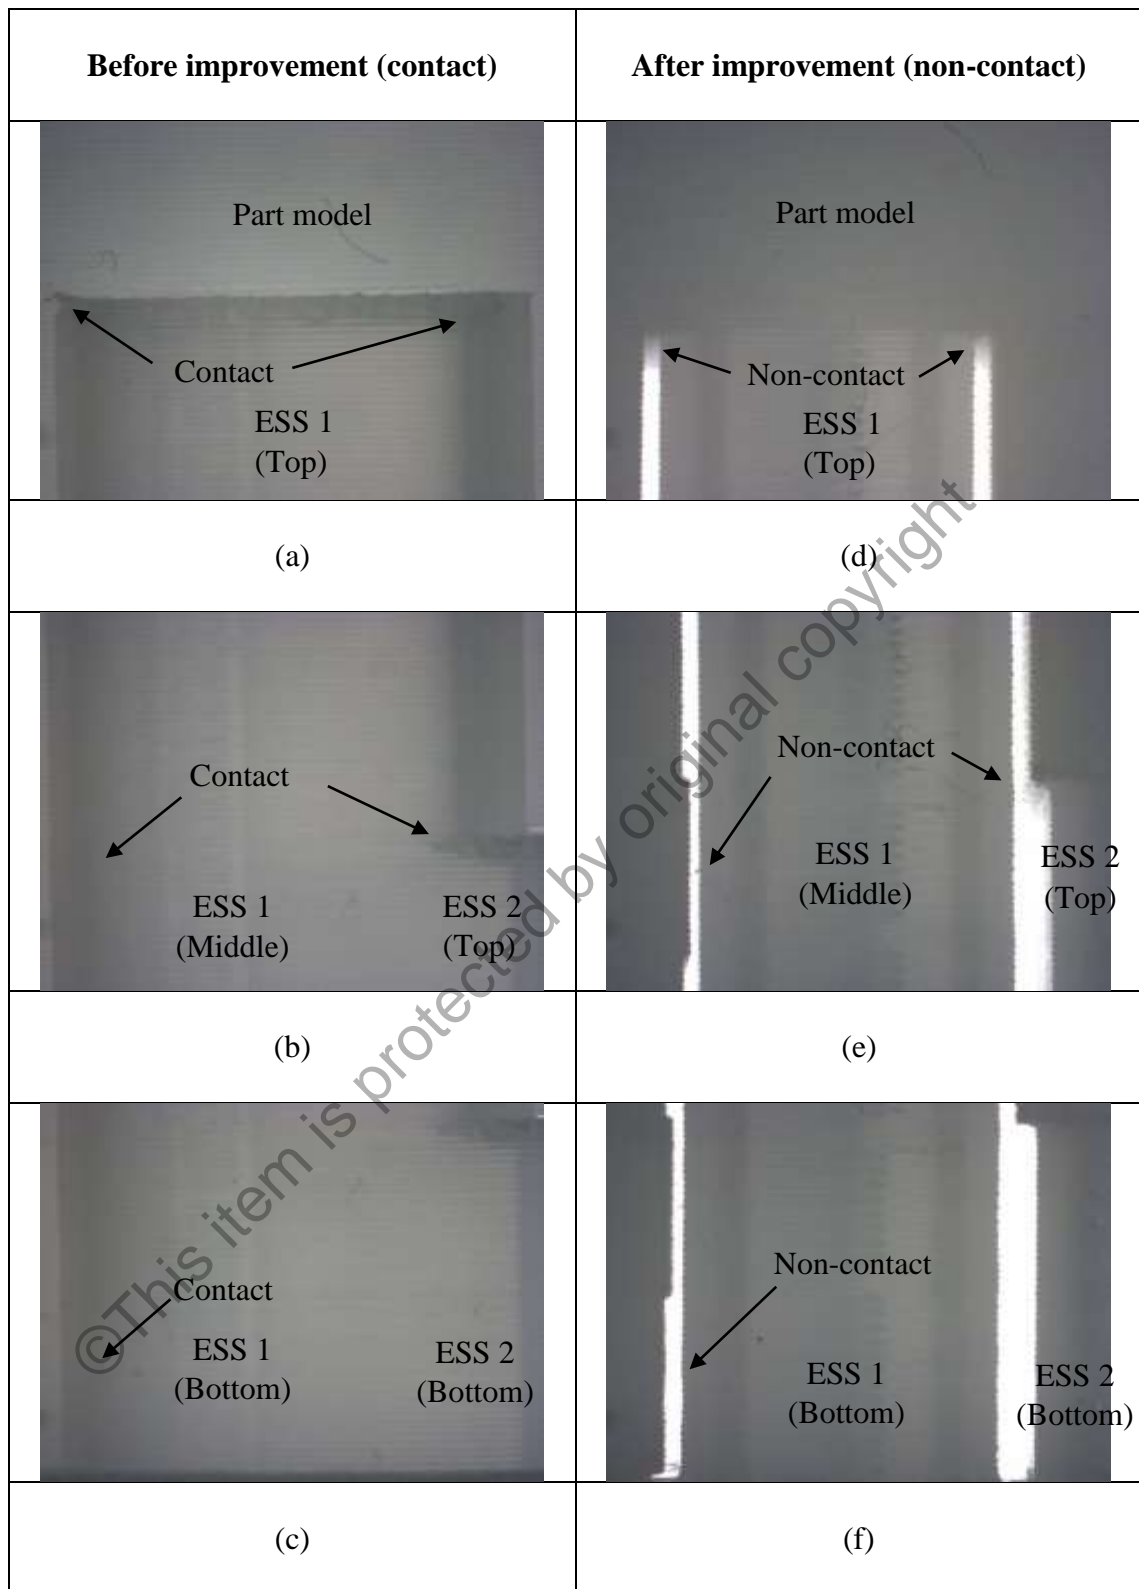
Actual part model produced by Zortrax 3D Printer machine;
